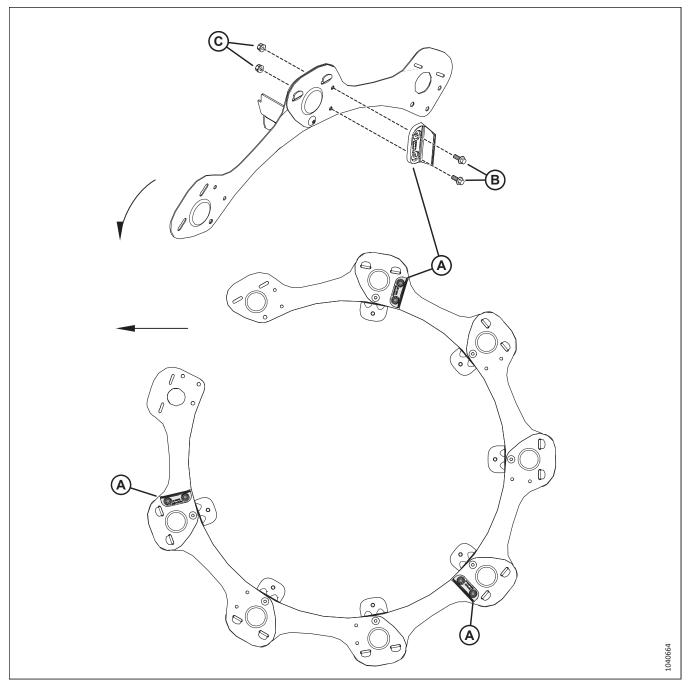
Nine-Bat Reel – Initial Endshield Assembly
